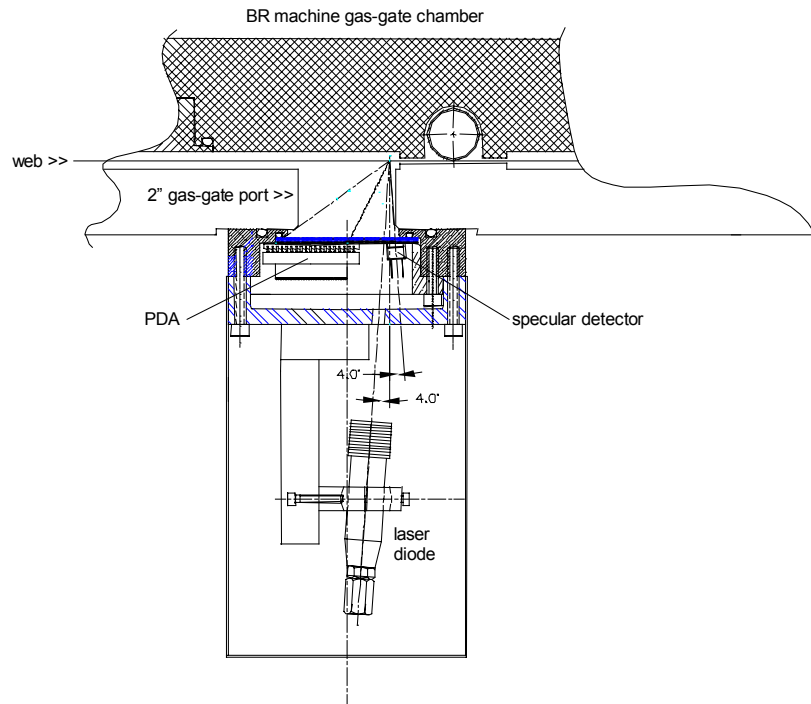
Drawing of the PDA scatterometer presently installed on United Solar's BR production machine.
